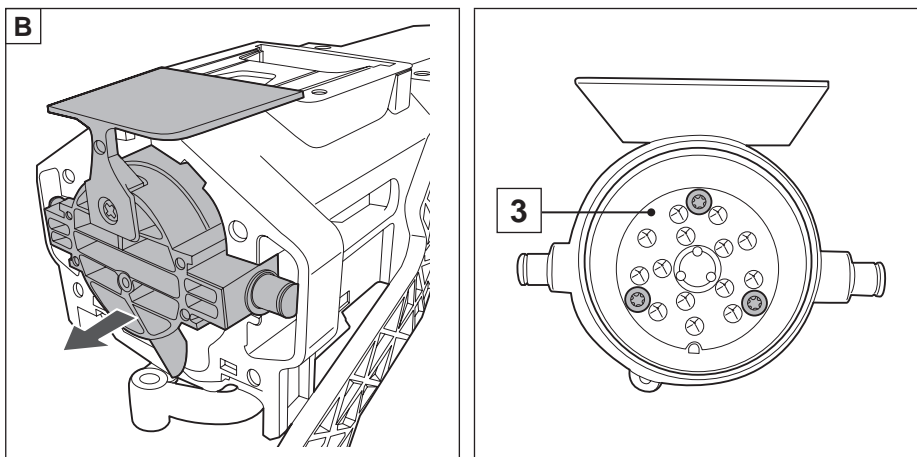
Figure B: remove the infusion chamber. Unscrew the three fixing screws of the CAPSULE TOP PIERCING SUPPORT (3) in order to extract it.
